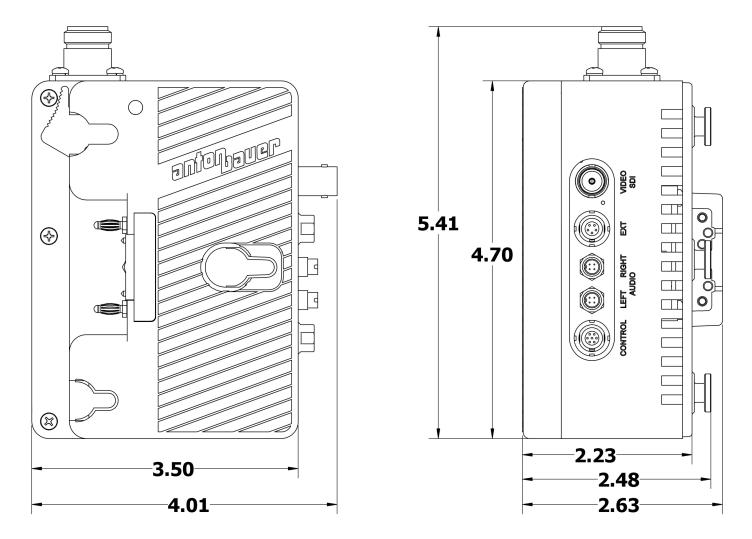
AB-HDTX Outline Drawings (Dimensions in Inches)
